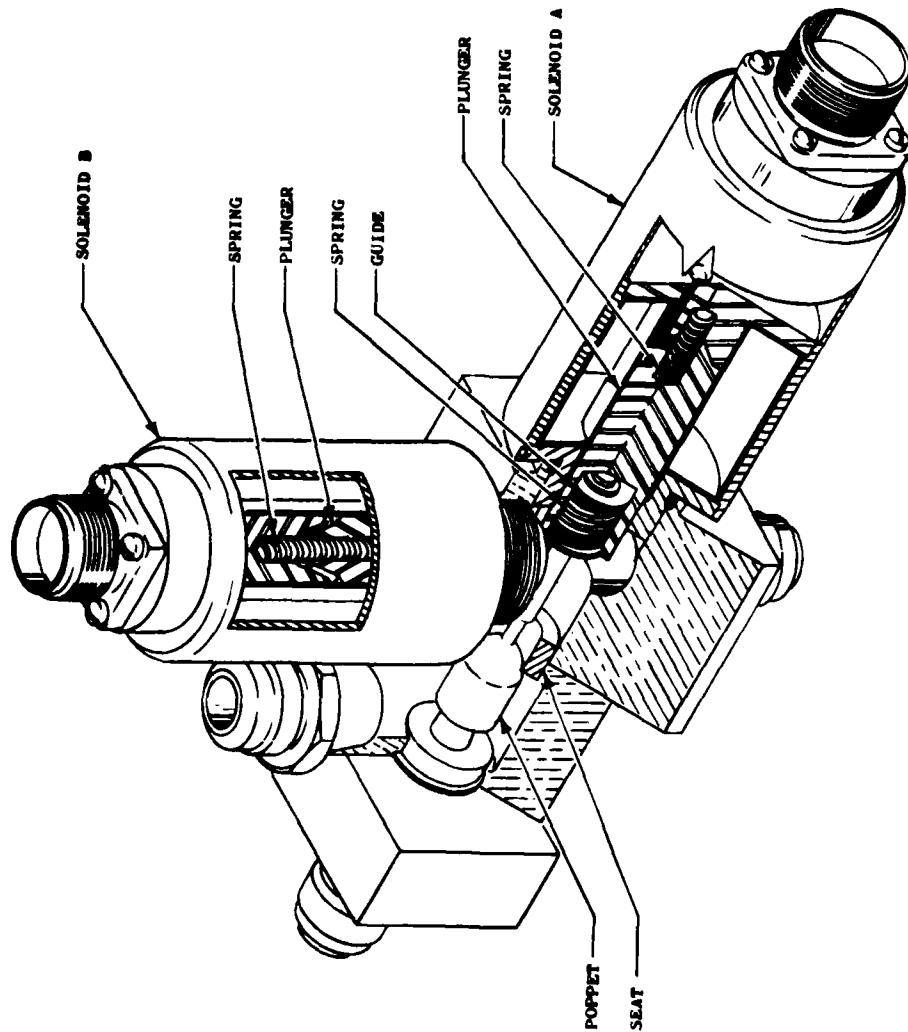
ASSEMBLY OF LIQUID OXYGEN BOIL-OFF VALVE
